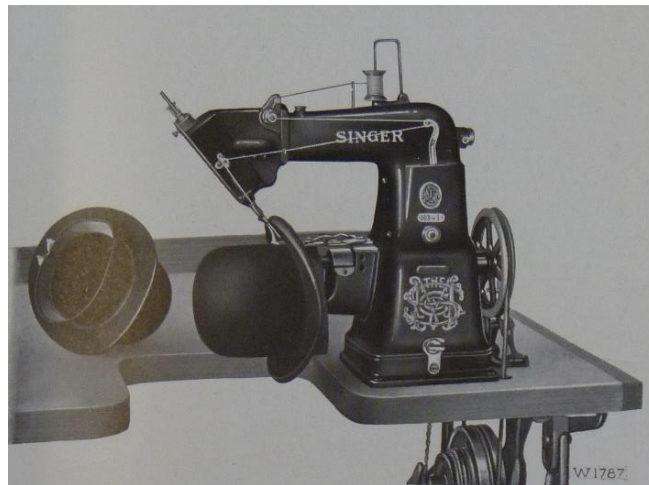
Model 103w1 cylinder arm machine with needle at oblique angle for stitching sweat bands, the head could also be swivelled back to accommodate the hat, *Singer Sewing Machine in the Manufacture of Hats and Caps* 1922 (Hagley Museum and Library)
